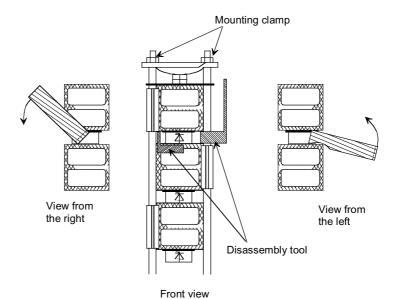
How to use the disassembly tool (at a left thyristor stack of a converter)
